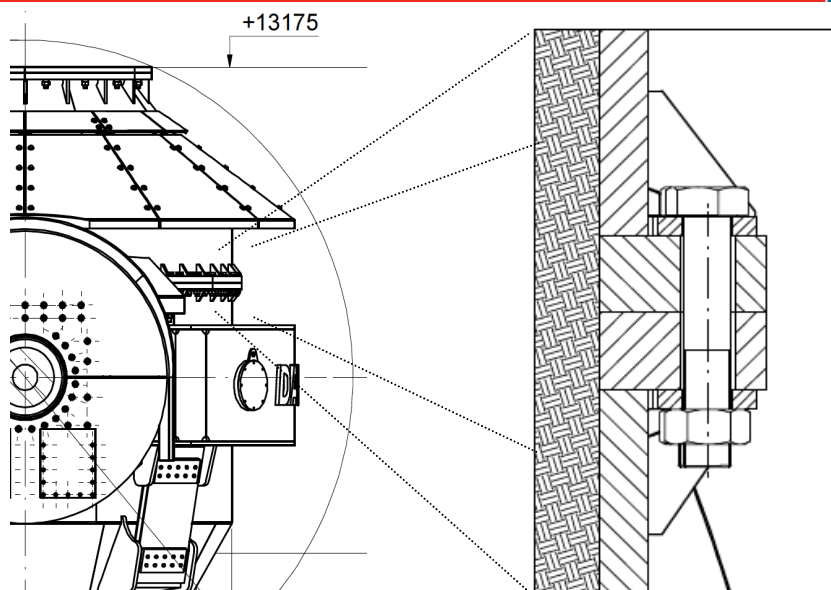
Arrangement of the flange connection between upper and lower part of the vessel shell (right flange details)
